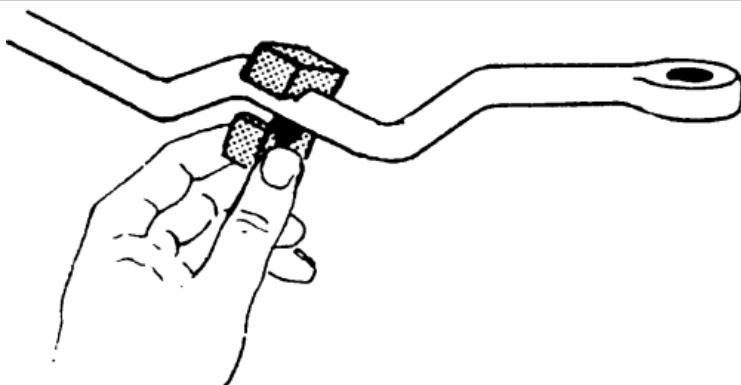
The bushing opening should face towards the front of the vehicle when installed
